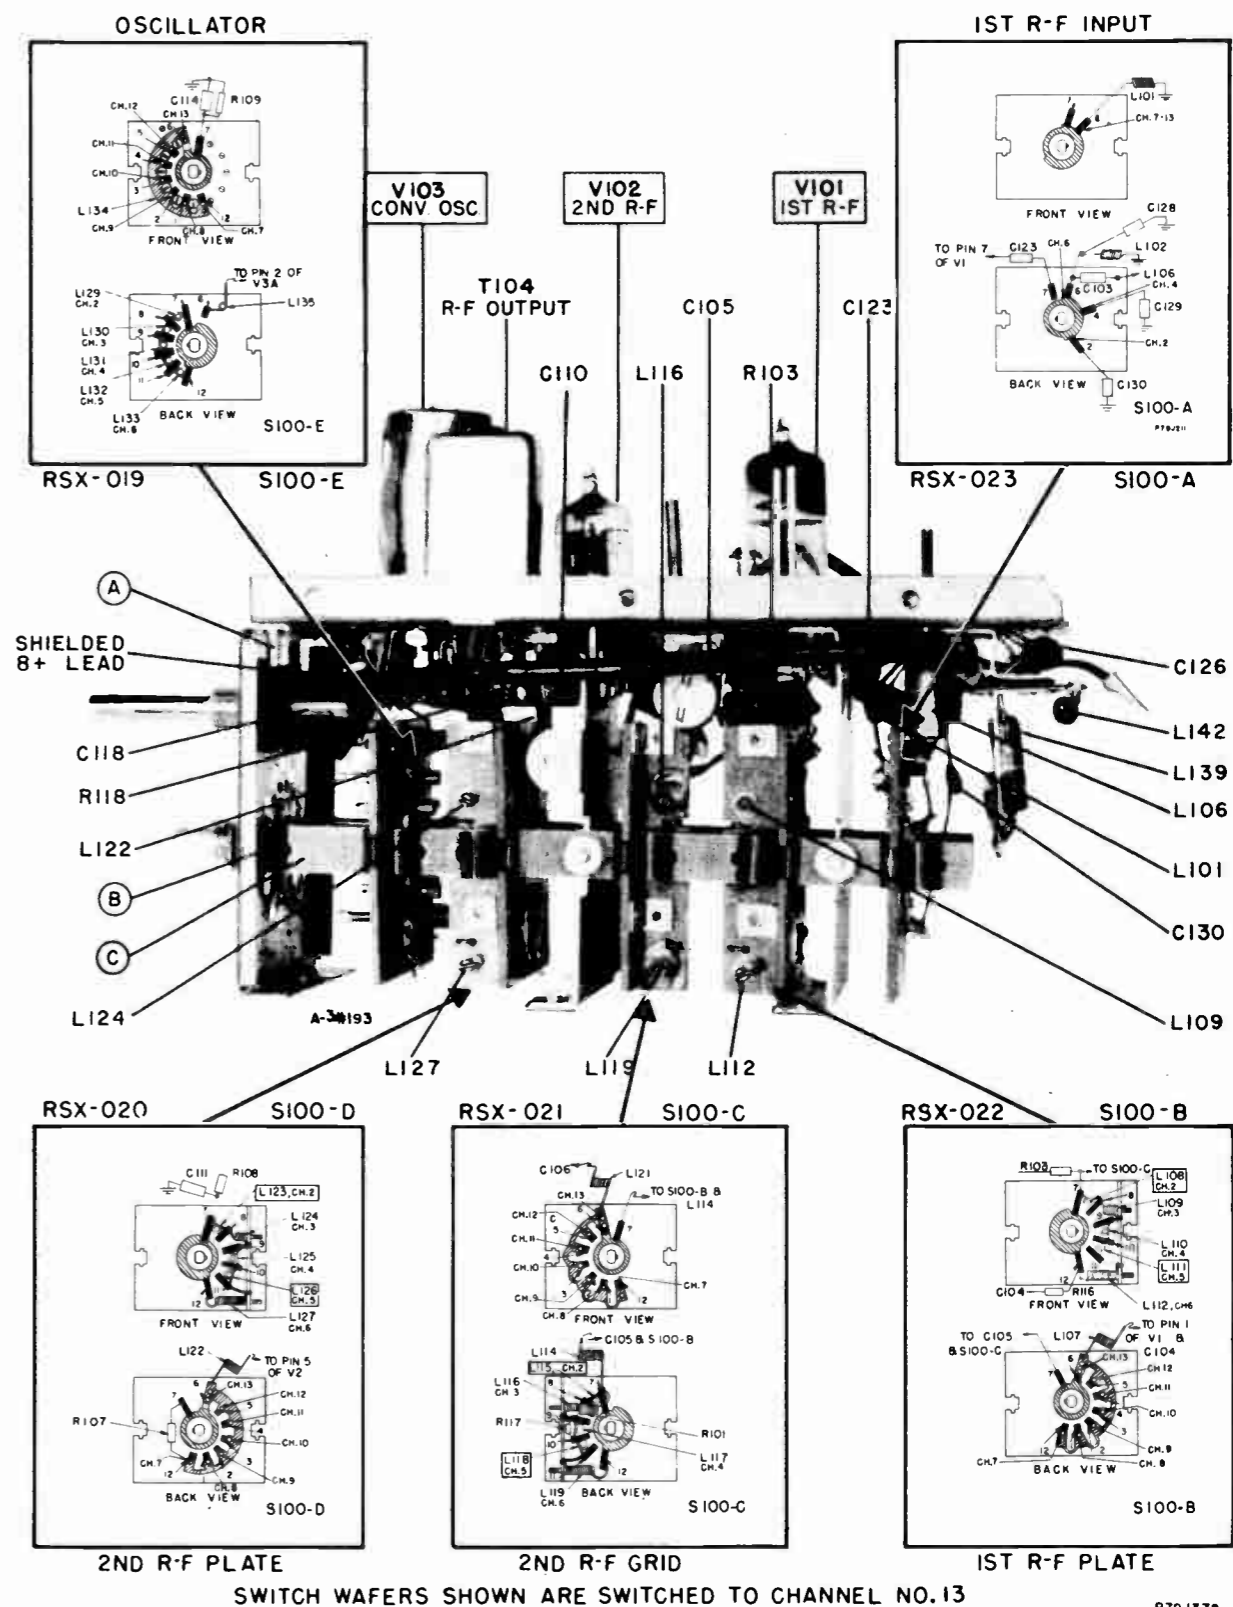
R-F Tuner and Switch, Wafer Wiring
